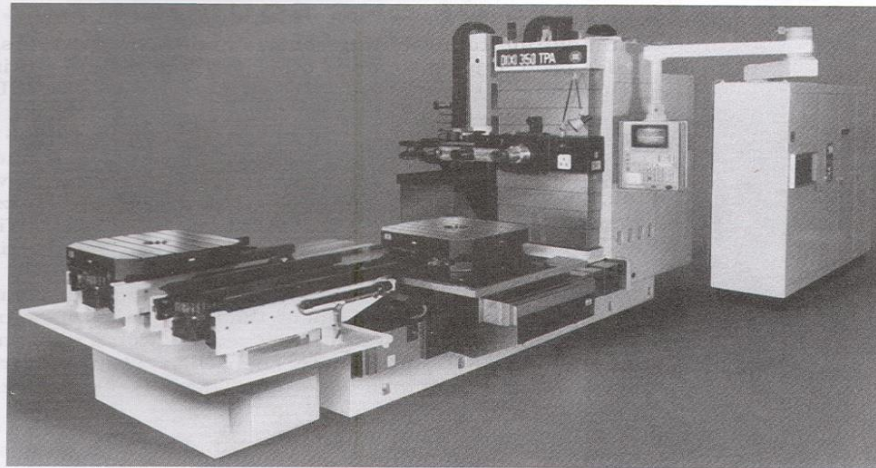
A horizontal spindle machining center with an automatic tool changer and two pallet work changers. (Photo courtesy of American SIP.)
